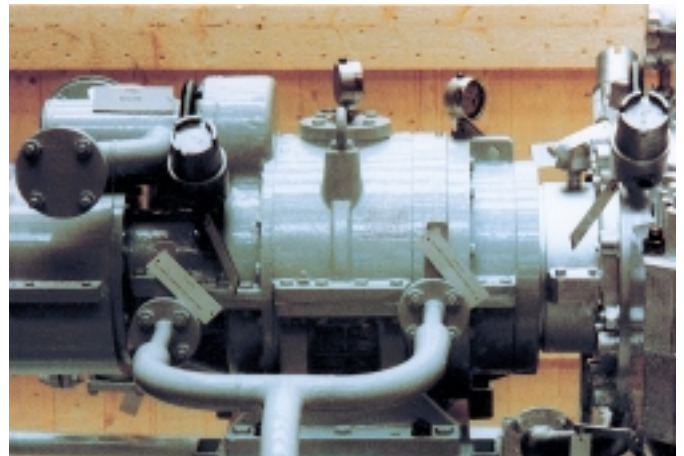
BHS Epicyclic Gear Unit, Type RHP, between electric motor and compressor.
